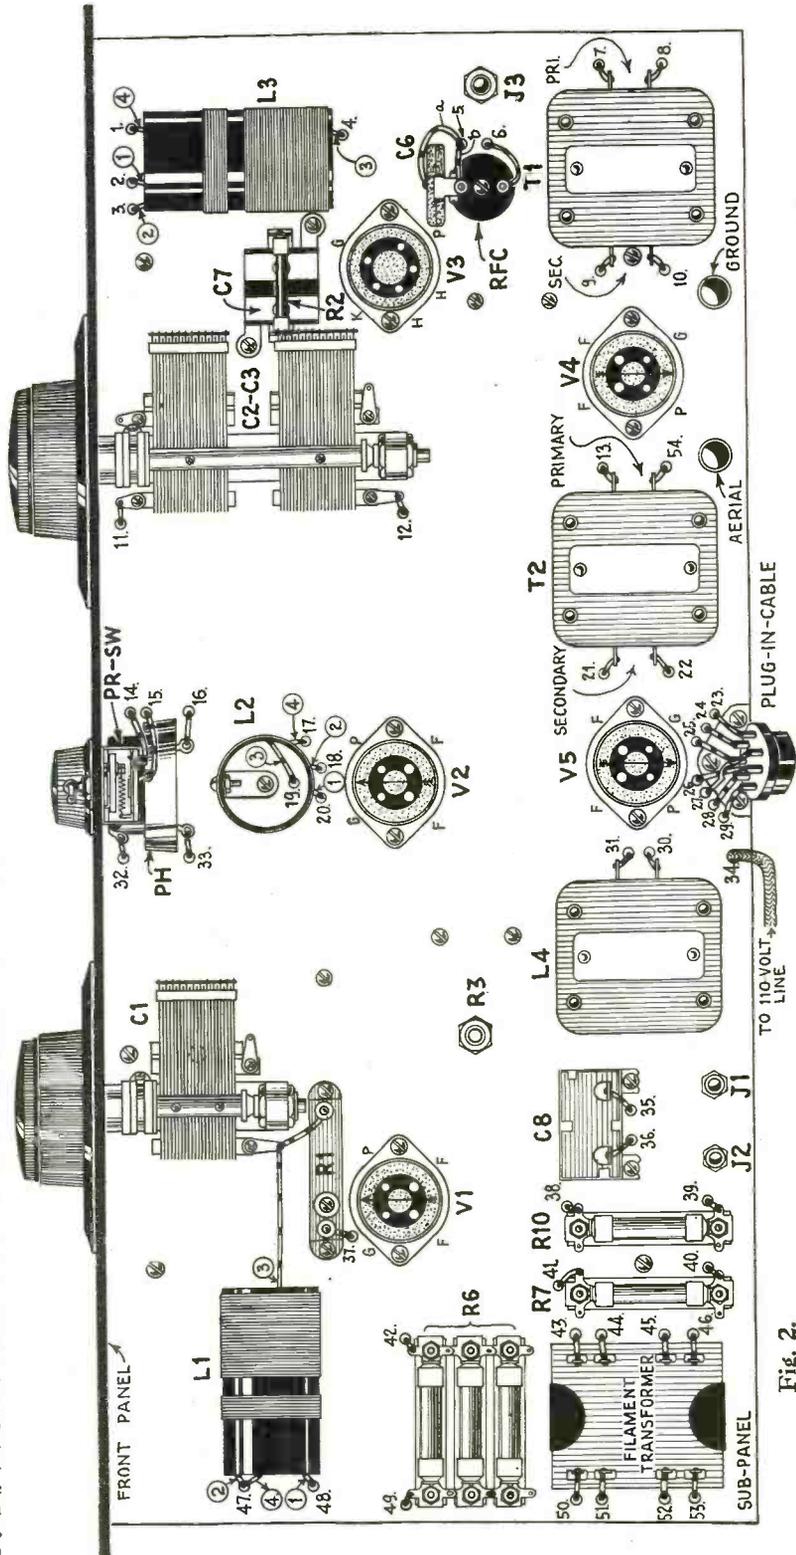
Instrument layout and wiring connections above the sub-base panel of the "Lamp-Socket Fire." See underside arrangement below.
